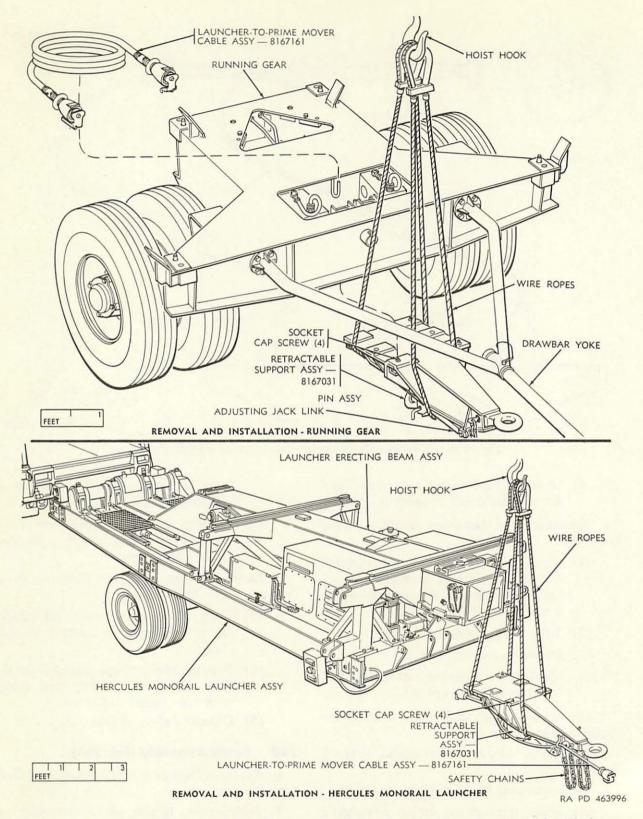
Retractable support and launcher-to-prime mover cable assembly - removal and installation.
